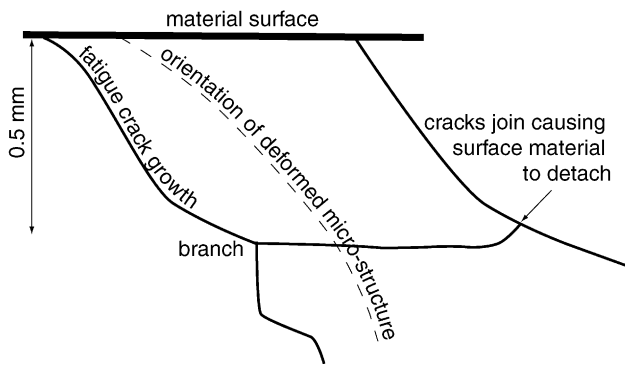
Schematic representation of growth of surface initiated fatigue cracks in wheels. Once initiated, the crack will deviate to an almost radial direction. At a depth of about half a millimeter, the crack will tend to deviate (or branch) towards a circumferential growth. Final fracture will typically occur as deattachment of a piece of the surface material when the cracks deviate towards the surface.
